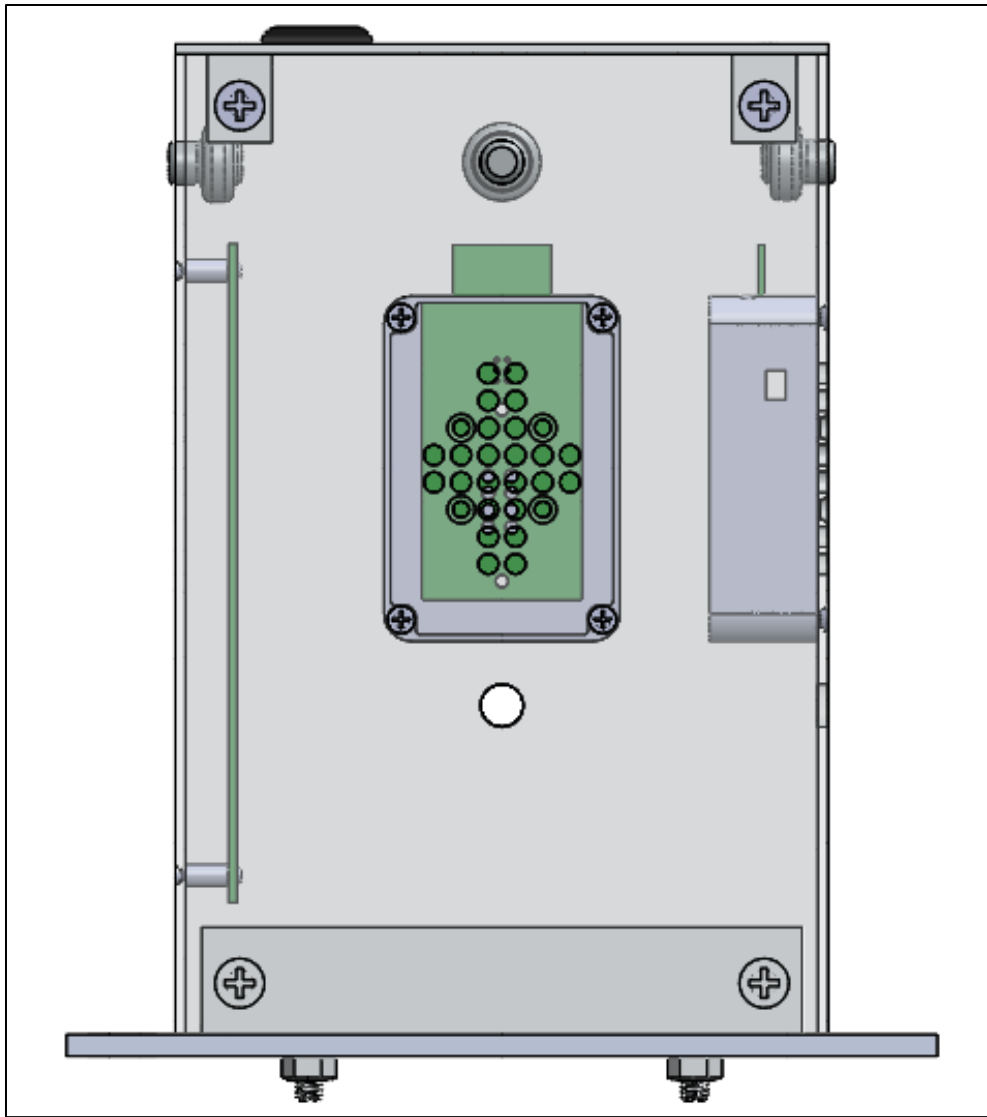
(d) Inside view of design of sides # 1 and 3 of the payload
